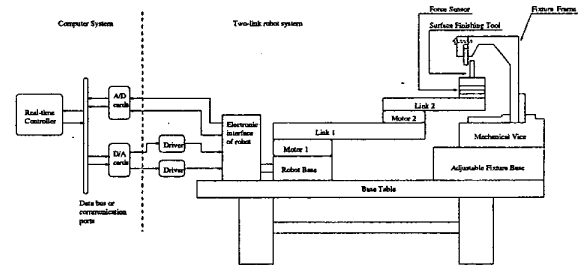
Schematic of the Robotic Surface Finishing System two-axis direct drive manipulator, which is shown in Figure
